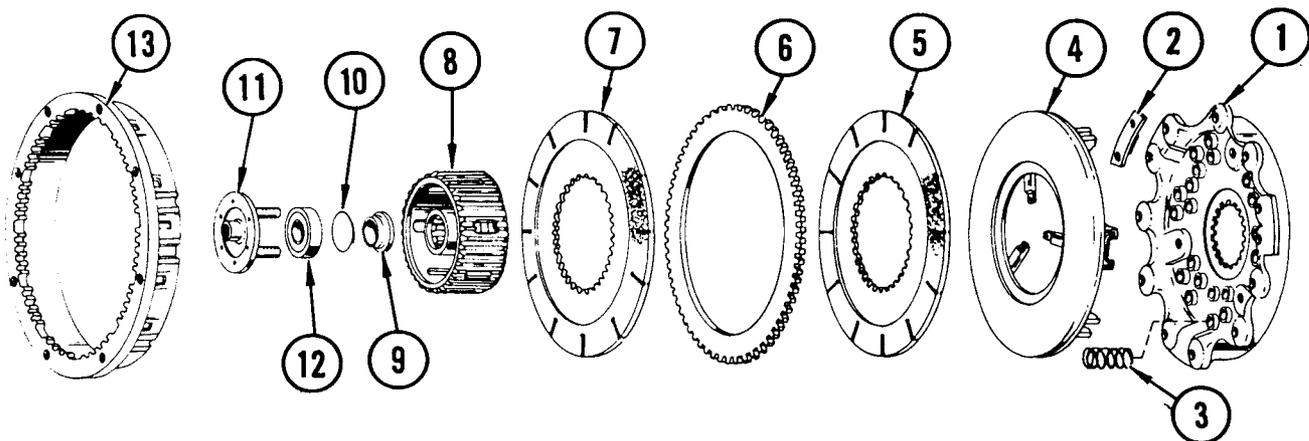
EXPLODED VIEW OF CLUTCH ASSEMBLY (2 DISC)
